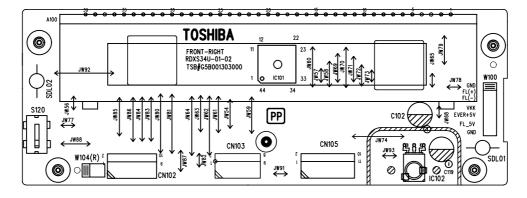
EU03A Front (R) PC Broad (Top side)
